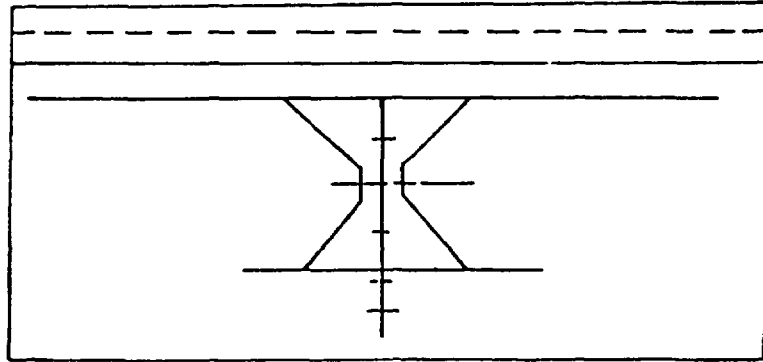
Sketch showing the weld preparation and its mirror image as drawn.
